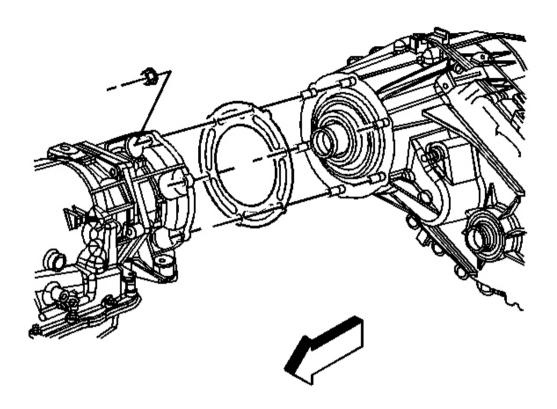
Transfer Case Assembly Courtesy of GENERAL MOTORS CORP.
